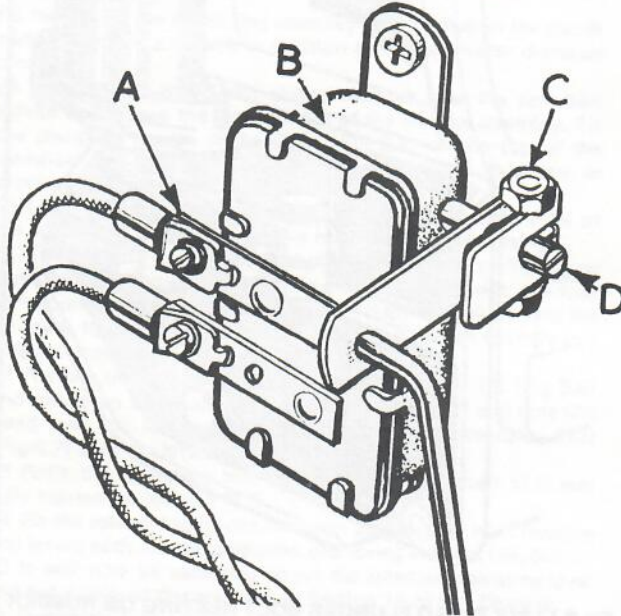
OVERDRIVE THROTTLE SWITCH
